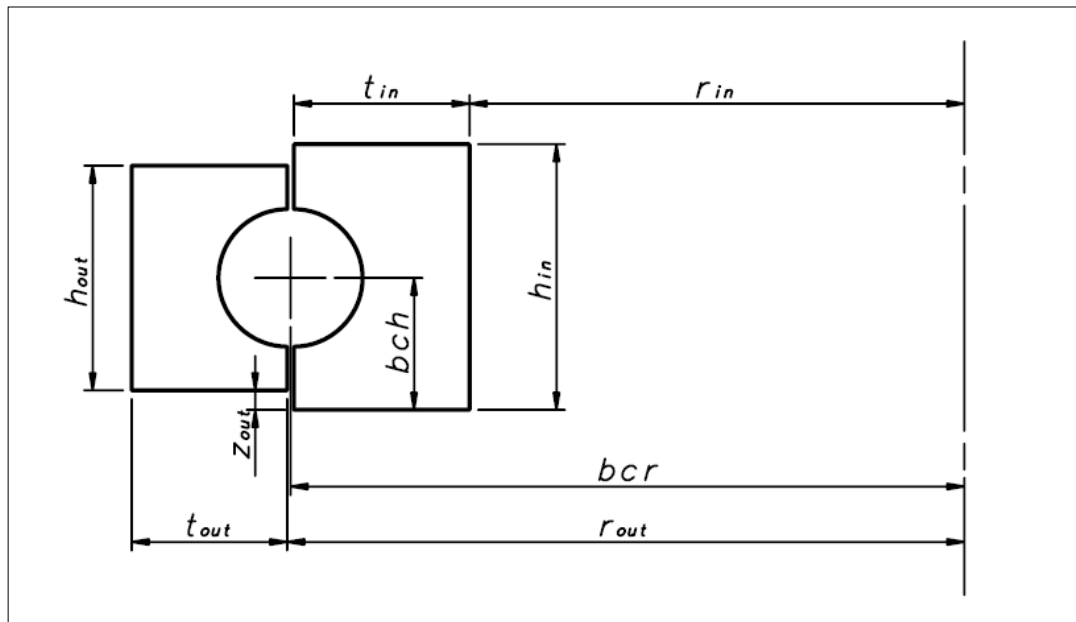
Dimensional parameters of the outer geometry of the slewing bearing
